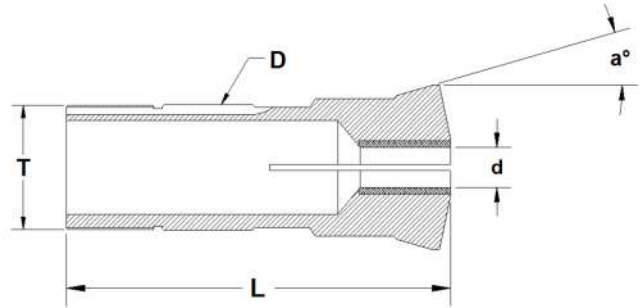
Carbide Lined Guide Bush - with Reinforced Shank
